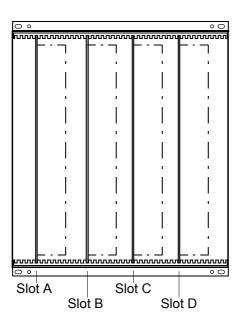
Mounting slots for the peripheral modules in the 7XP204 housing (front view) The module guiding grooves are marked.
